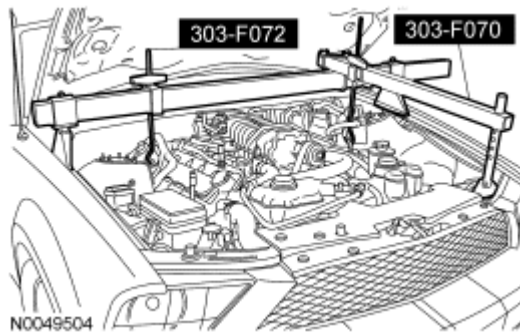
Raising Engine Using Special Tools (303-F072) & (303-F070)
